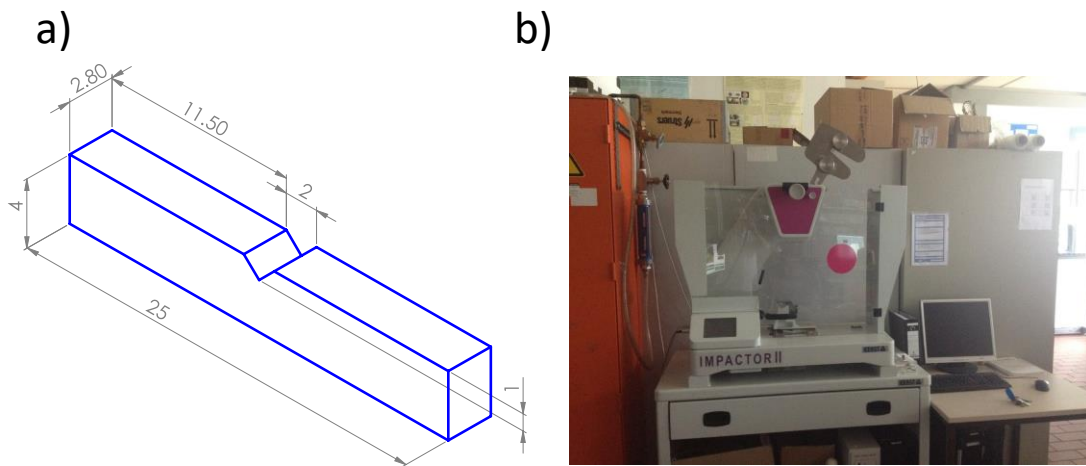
a) Technical drawing of Charpy impact test sample. All dimensions are in mm.
